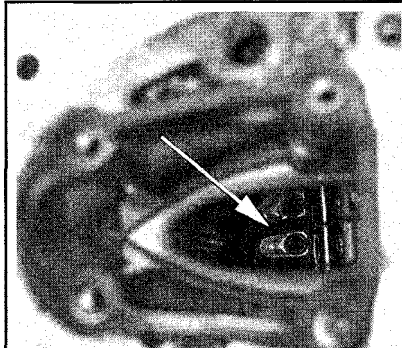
making sure to align the lever with the gearcase shifter bore
